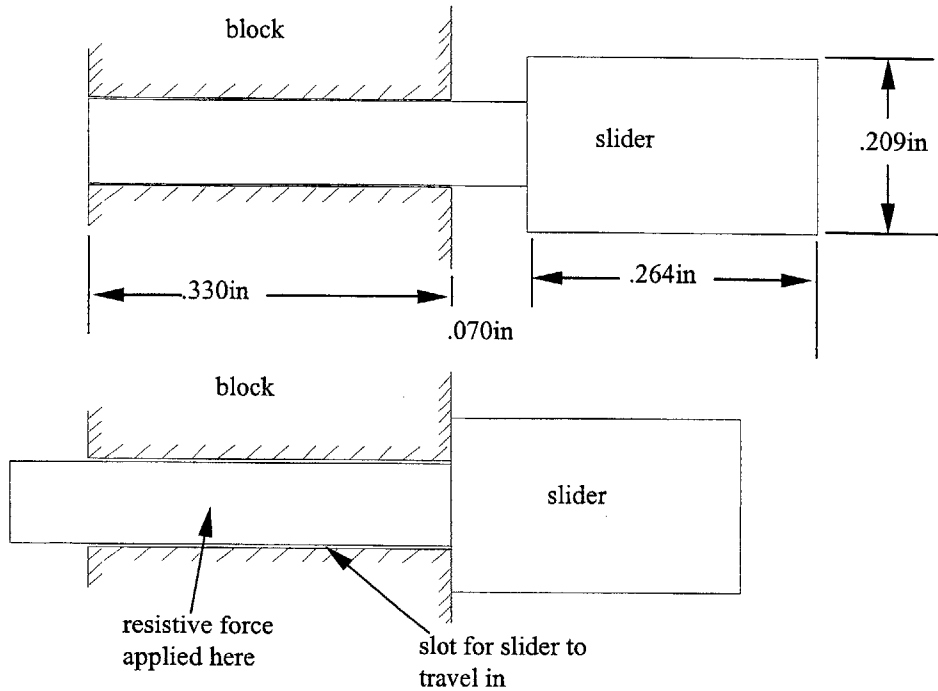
(This shows a simplified front view of the slider and the slot in which it travels. The top view shows the unlatched position while the bottom view shows the latched position. The rectangular part has dimensions .400in X .100in X .240in.)
